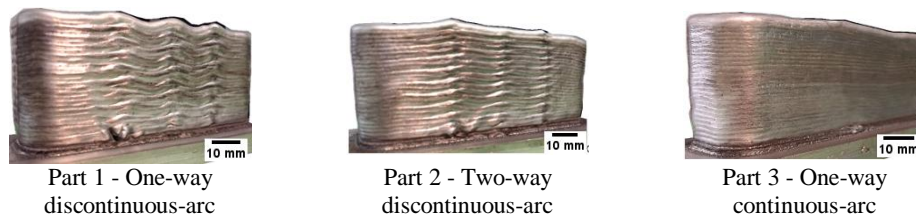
Produced parts of 40 layers with CMT. C: 56 A; U: 12.7 V; WFS: 4.1 m/min; TS: 60 cm/min.
